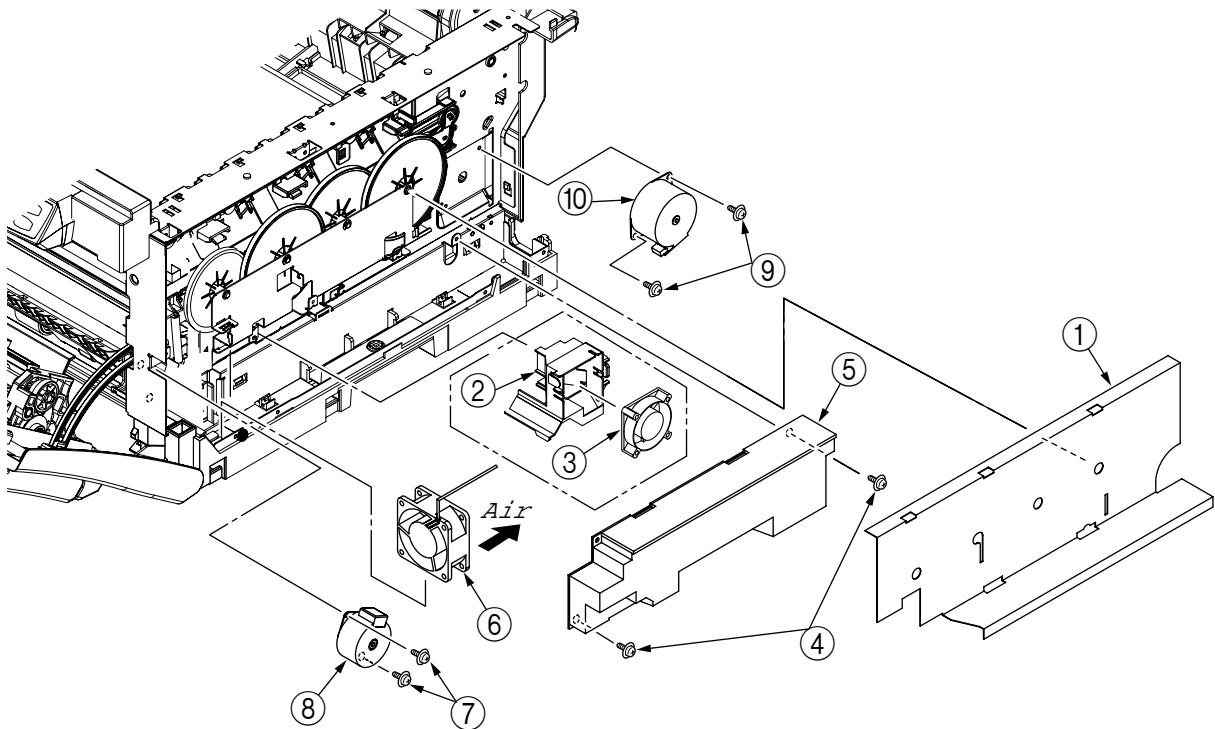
Low voltage Power Unit / FAN (ID) / FAN (PowL) / Hopping Motor / Fuser Motor
